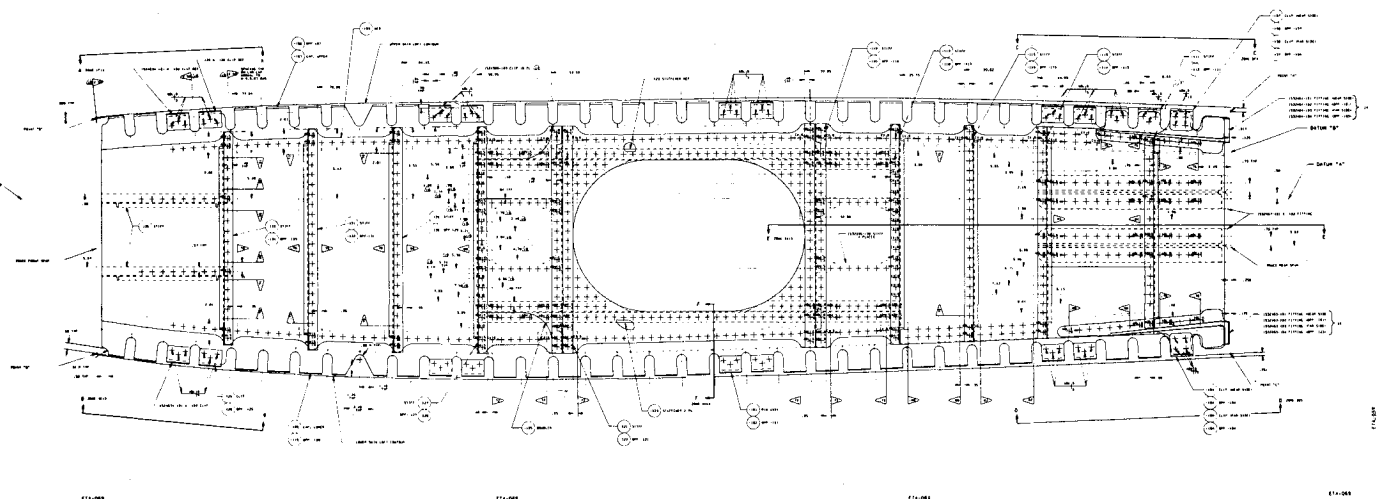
L-1011 horizontal tail rib assembly drawn on CADAM.
